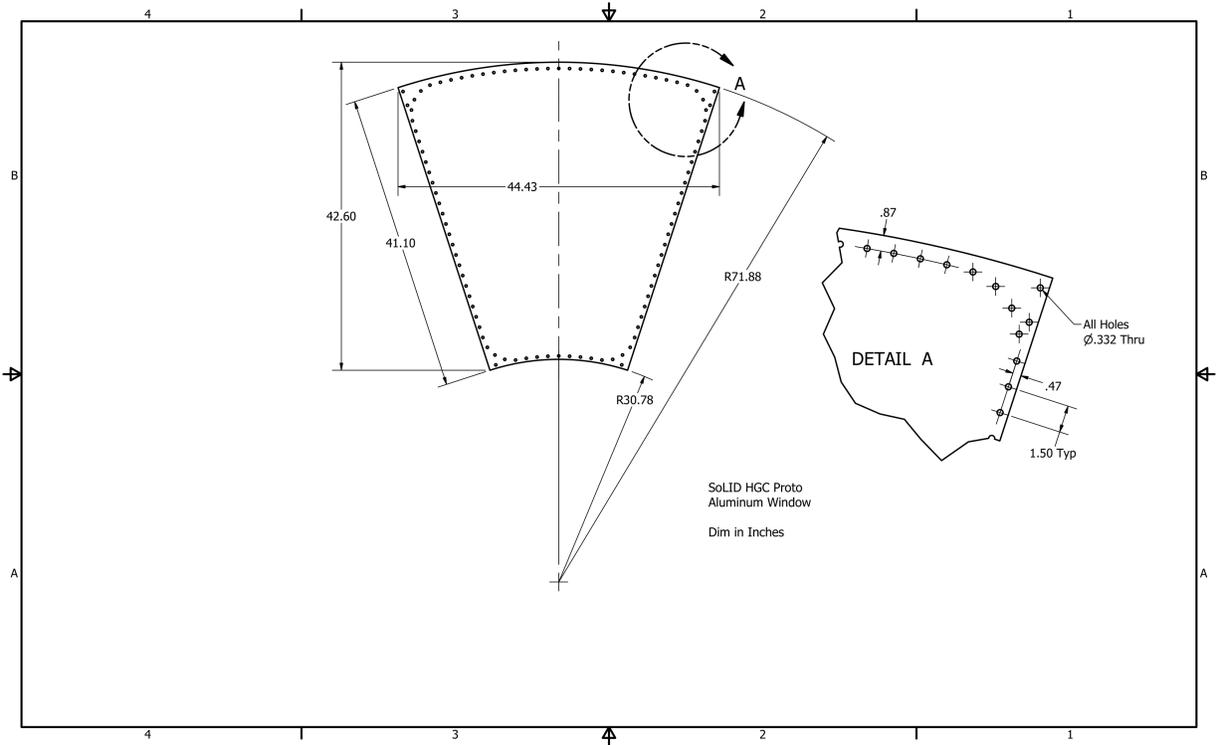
A technical drawing of the front window drawn by Gary Swift. All dimensions are in inches.
